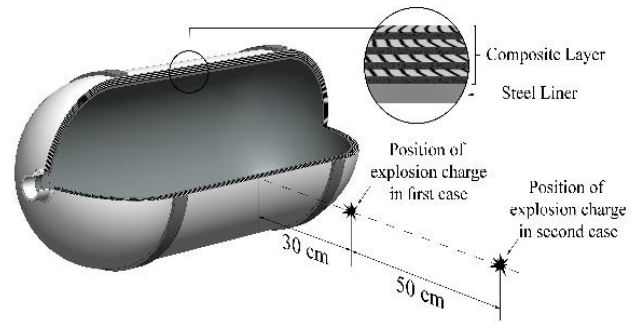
Schematic view of tanks, layering, and position of explosion charge
